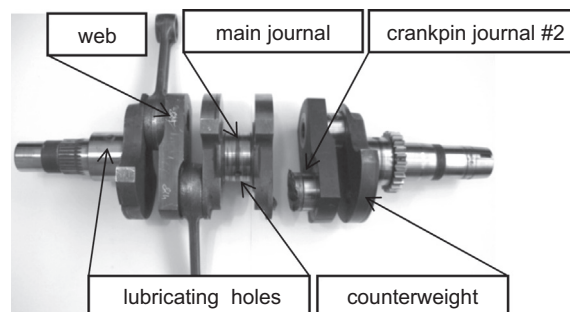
Image of the failed crankshaft. Fracture has occurred in crankpin #2.
